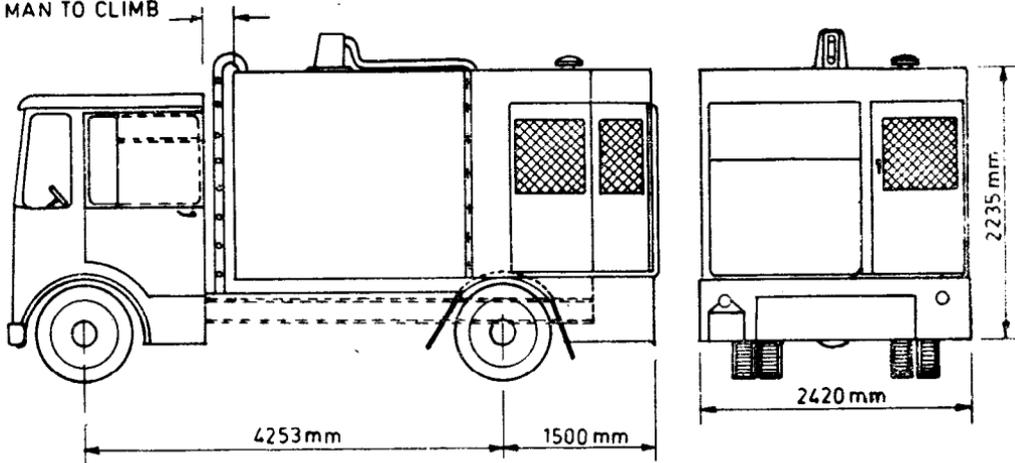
TYPICAL TRUCK MOUNTED HIGH PRESSURE JETTING MACHINE
